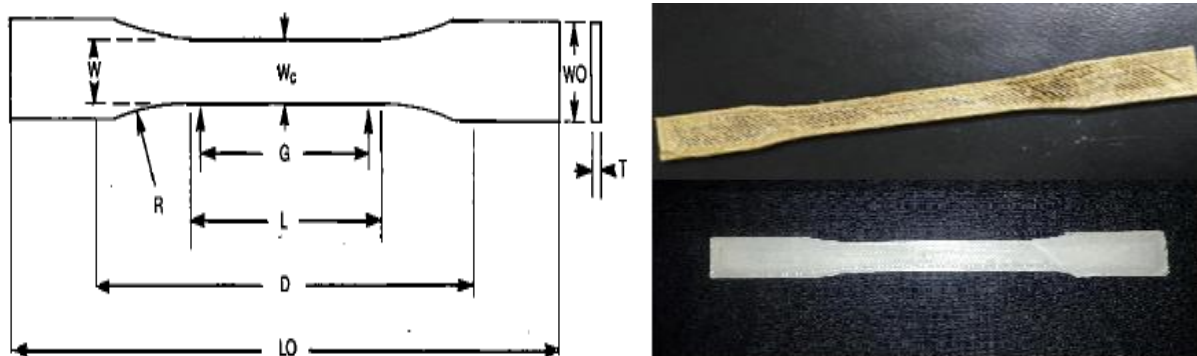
dog-bone sample designed using a standard 3D CAD program.
